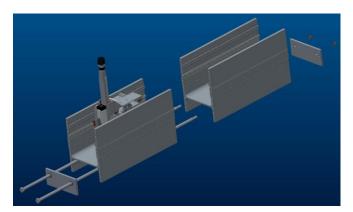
Two Lego-like joined bed hosting one movable cross-table
